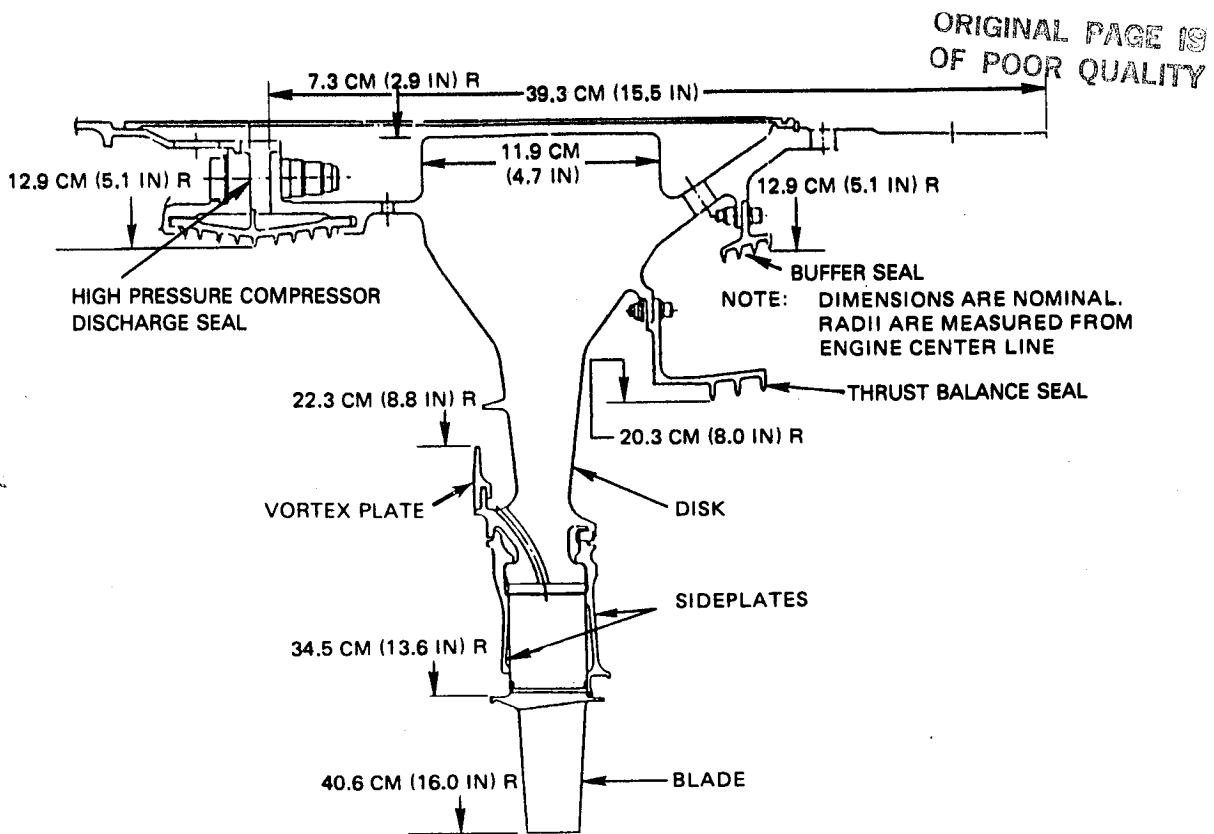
Mechanical Design of the High-Pressure Turbine Rotor Assembly
